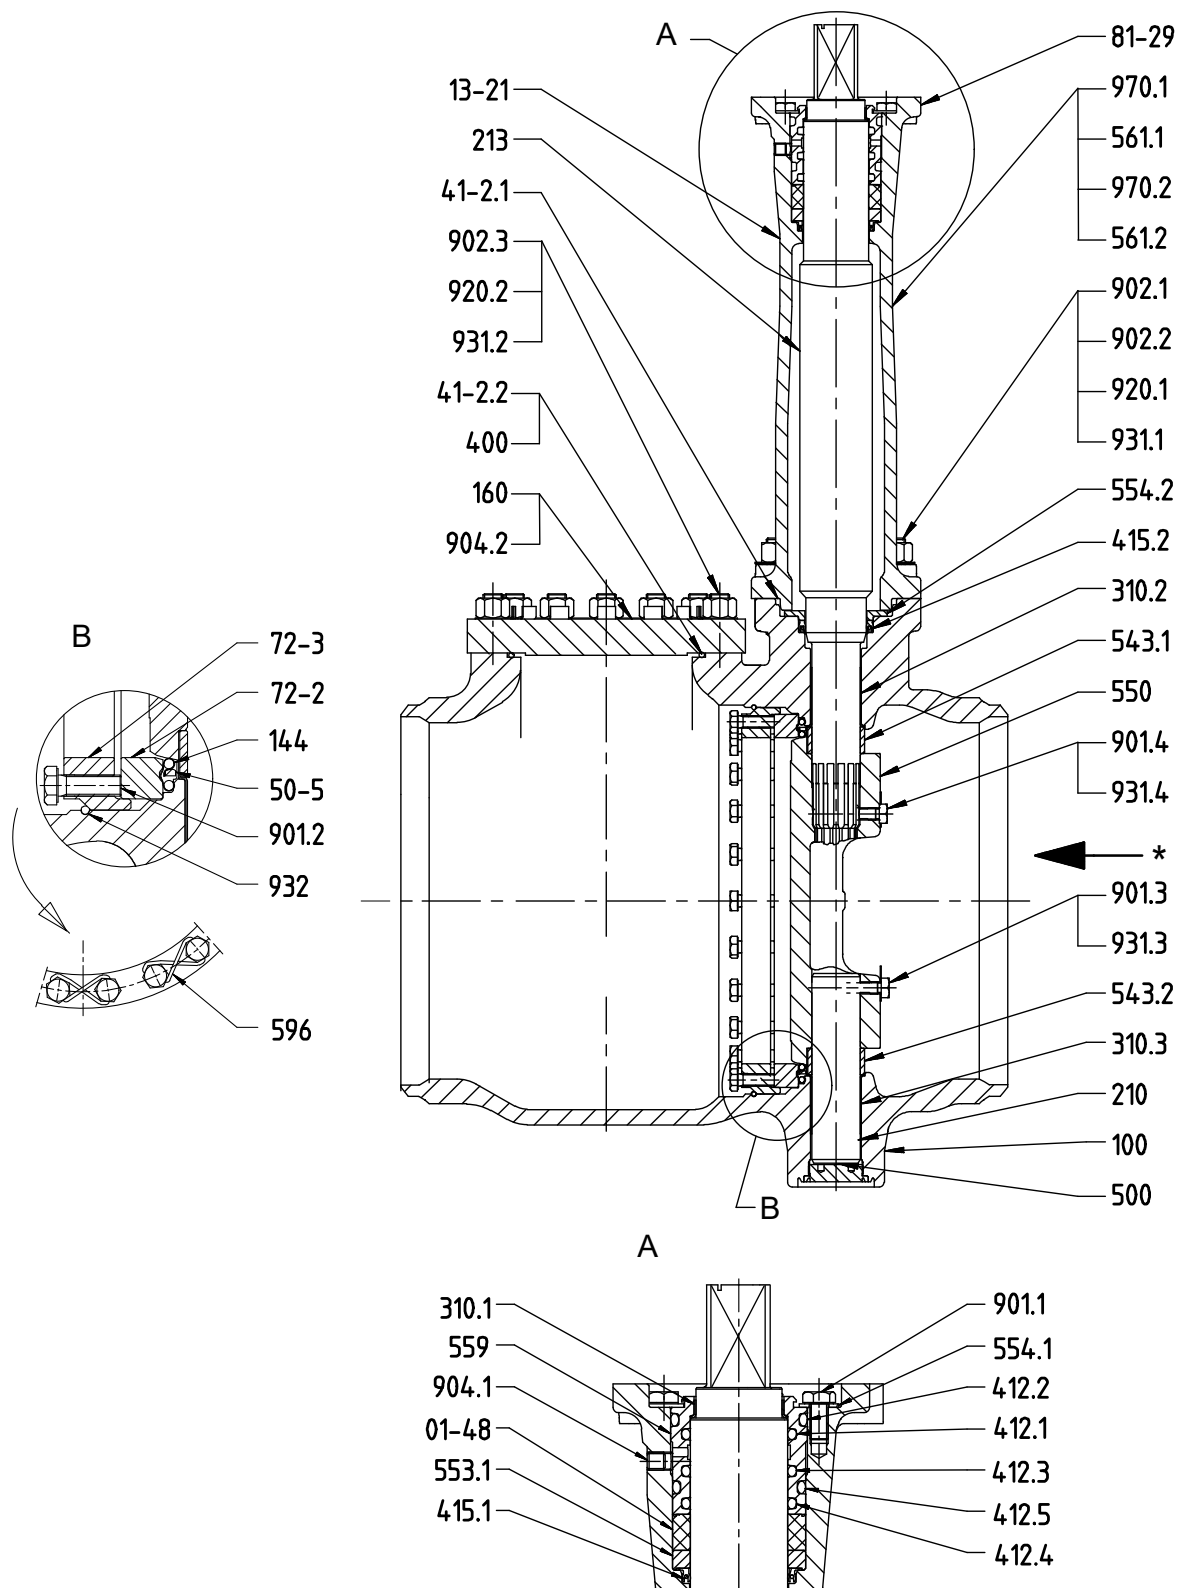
Sectional drawing of TRIODIS 150 CRYO BWSE - DN 300-400 (12-16 inch)
